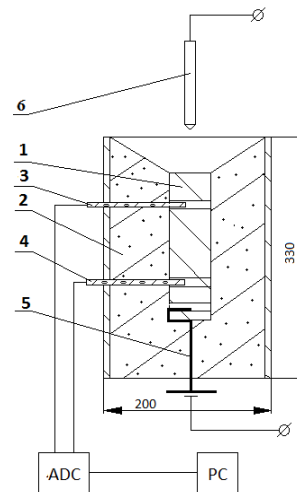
Schematic diagram of the experimental mold: 1 – sample; 2 – sand-clay mixture; 3 – thermocouple 1; 4 – thermocouple 2; 5 – contact; 6 – carbon electrode
